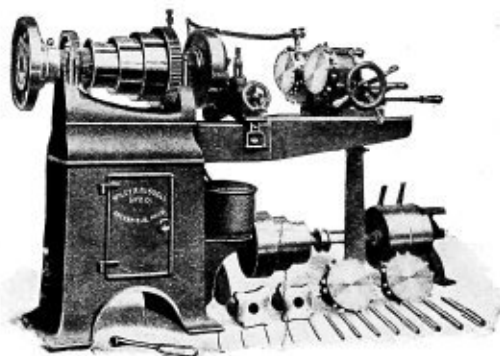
GREEN RIVER "OPENING DIE" BOLT CUTTER, NUT TAPER, PIPE THREADER AND CUTTING-OFF MACHINE
